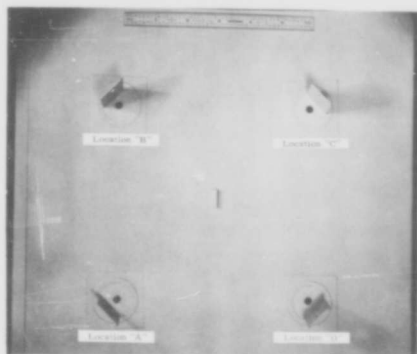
Inner Face Sealing Details and D-36 Columbium Heat Shield Panel
